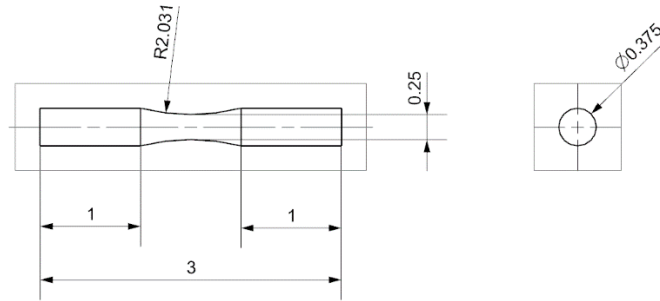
Geometry of "hour-glass" rotary bend fatigue test specimen (inches) where both sides are inserted into collets, and the center is polished to 600 grit.
